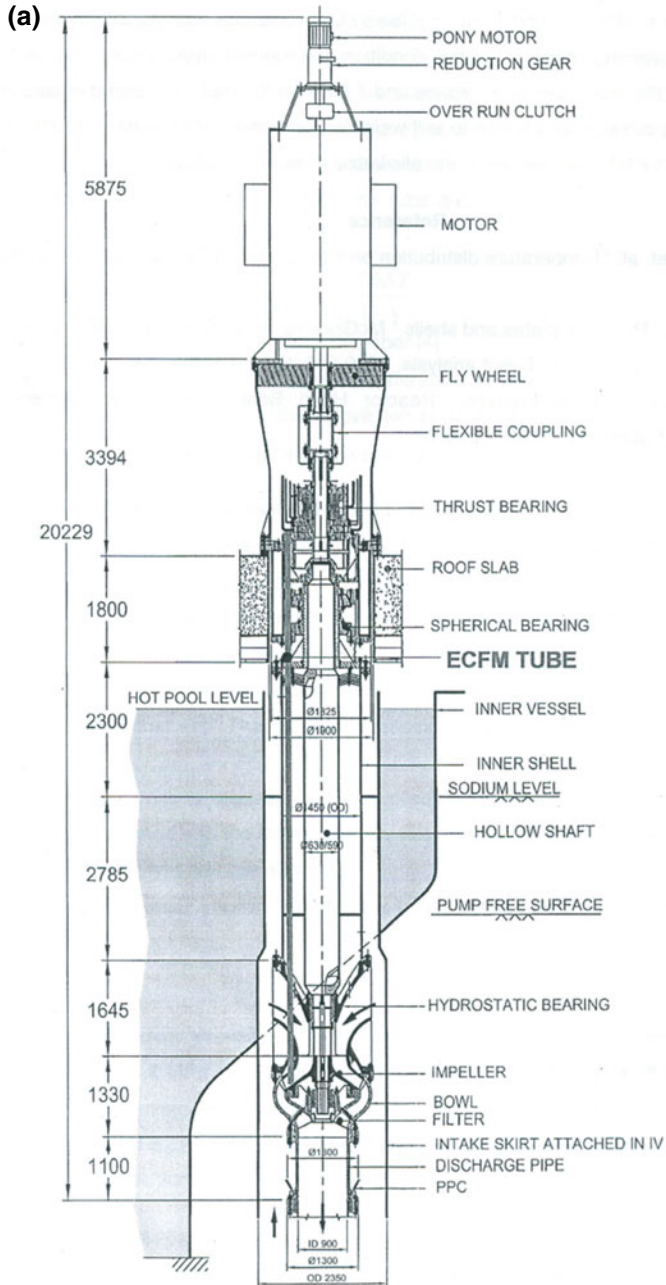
a Schematic arrangement of sensor installation in PFBR (with primary sodium pump)
